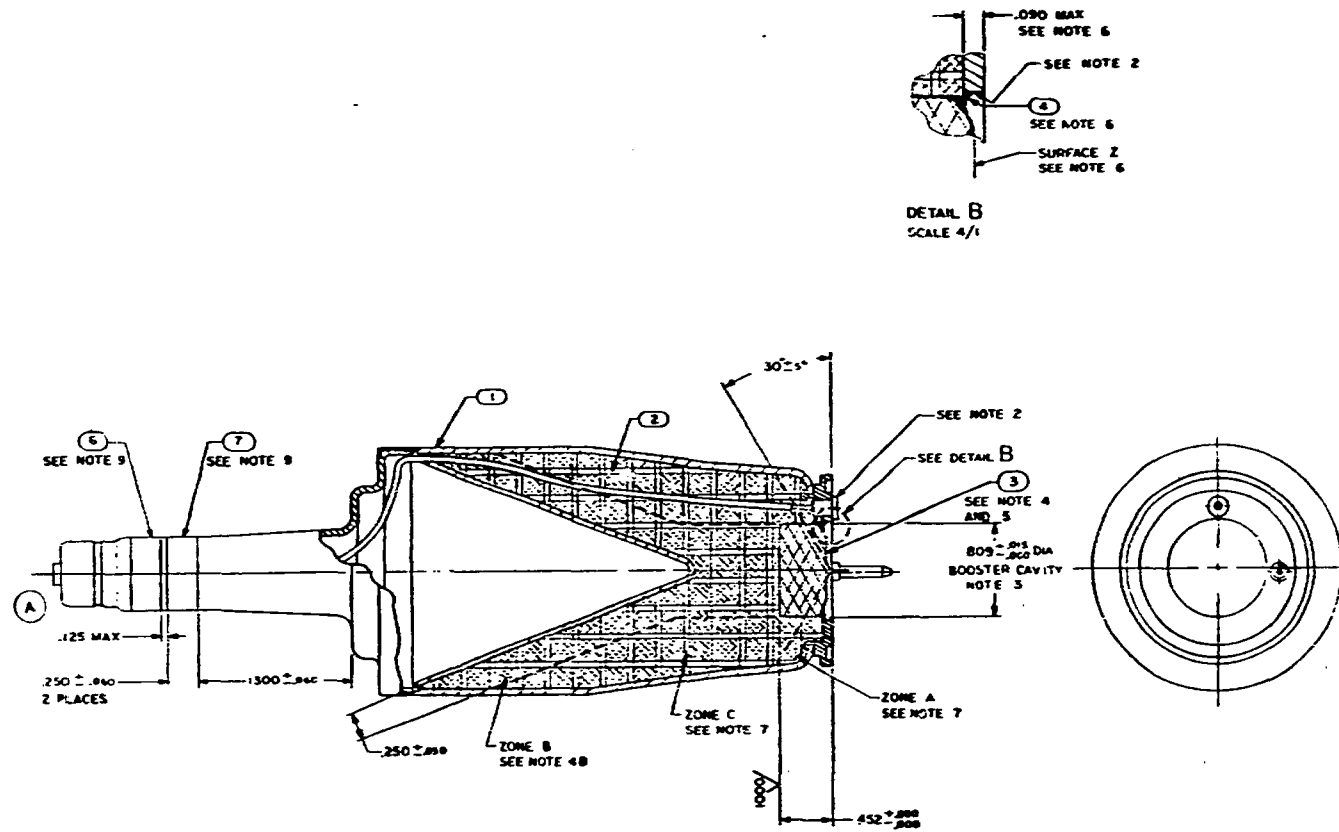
LOADED METAL PARTS ASSEMBLY
